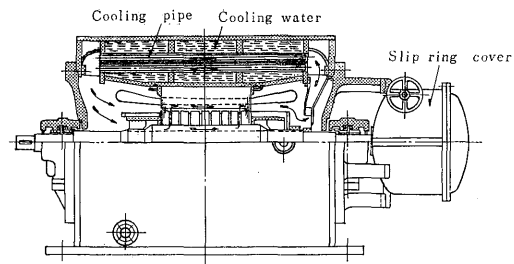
Explanatory section view of stator water cooled flame-proof induction motor
